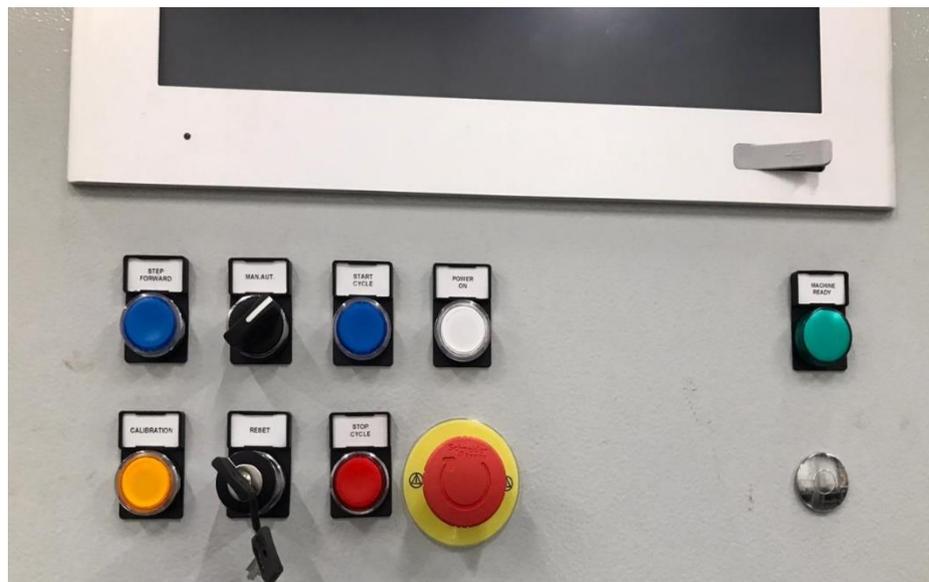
CMME 7001 C installed on board on MIB OR machine
